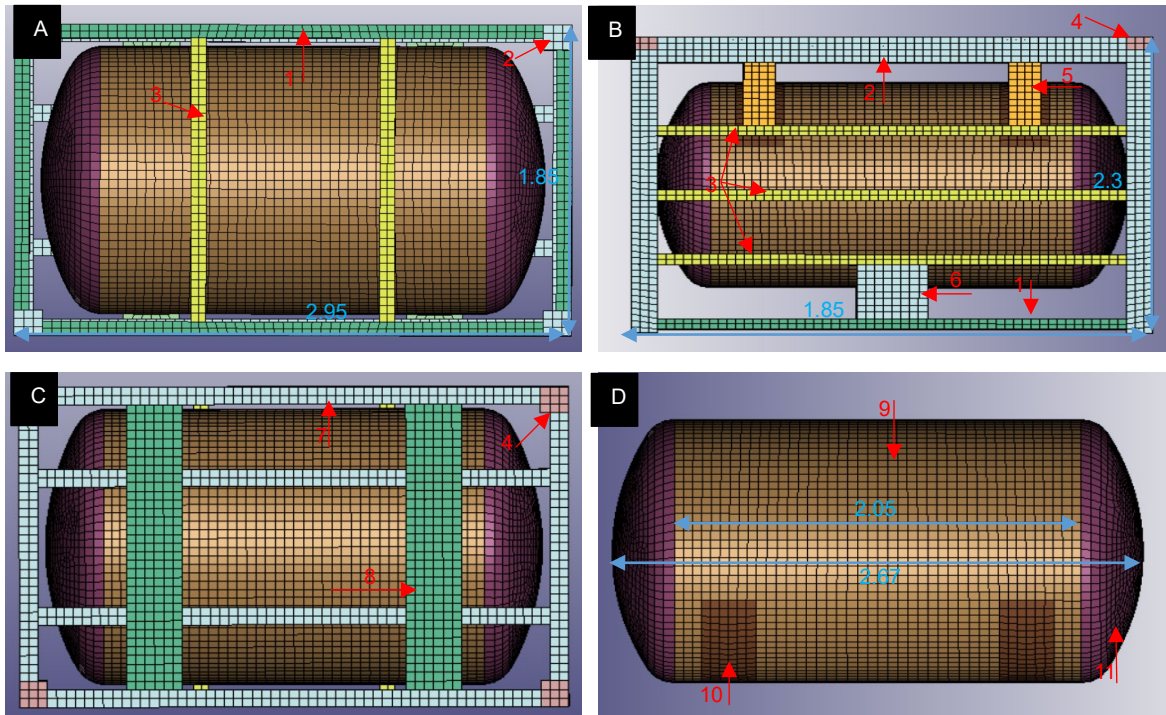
Dimensions of the tank frame from: top view (A), front view (B), side view (C), and only tank front view (D). All dimensions are in meters.
